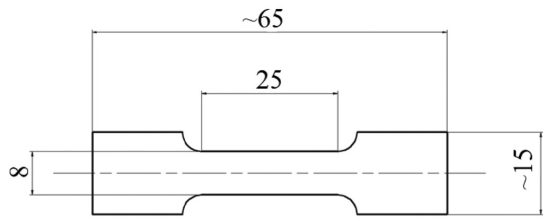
The technical drawing of specimen for tensile testing cut from welded joints
